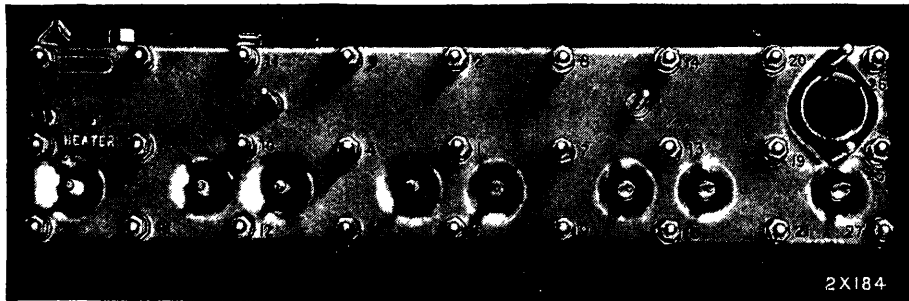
Cylinder head tightening sequence. 1935-50 eights
